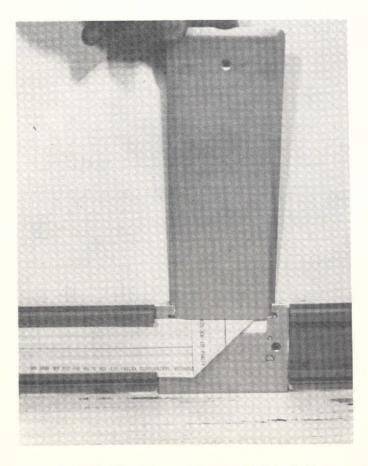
Inserting Cable Riser Cover Behind Connector Plate Tabs
